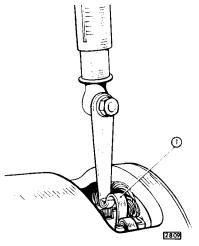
Testing the brush spring tension. Brush spring indicated.
